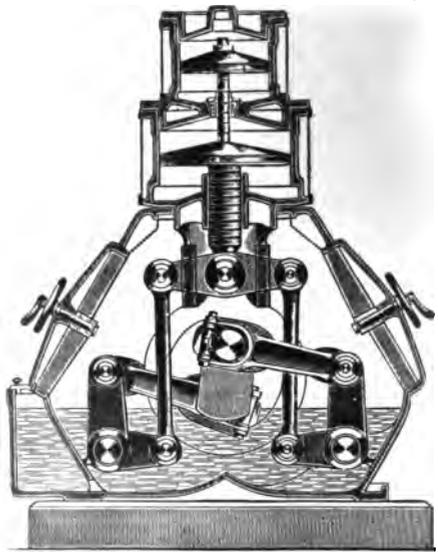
SECTIONAL VIEW OF MERTZ'S SINGLE-ACTING ENGINE.
